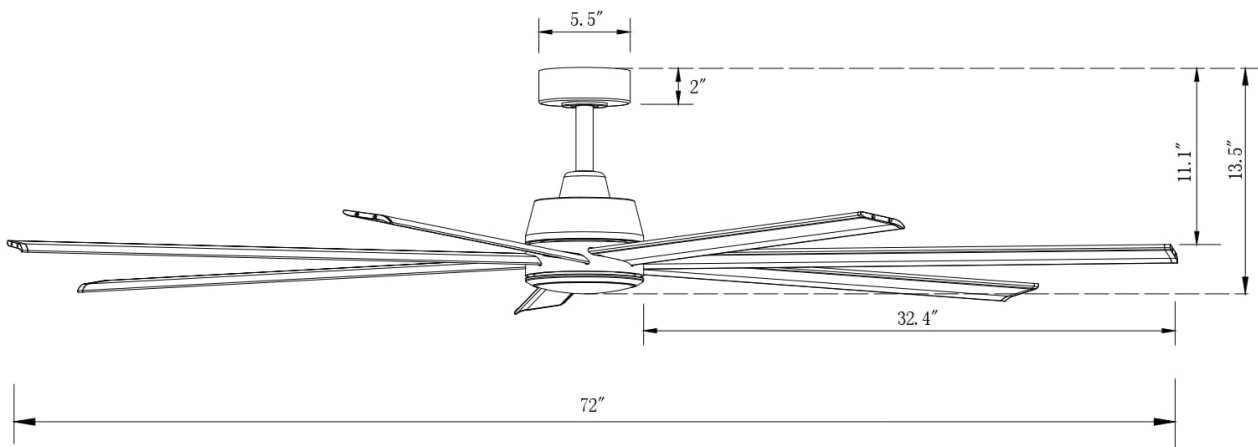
Dimensional drawing showing the fan's 72-inch diameter and 13.5-inch height.
